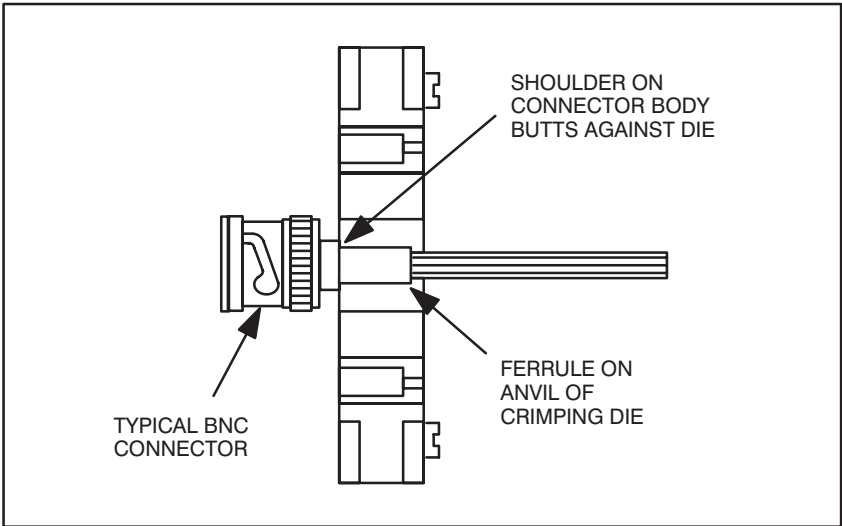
Connector Installation Step 9 for RG-59/U Cable
